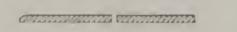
A Butt Seam. Fig. 171. A Riveted Butt Seam,
